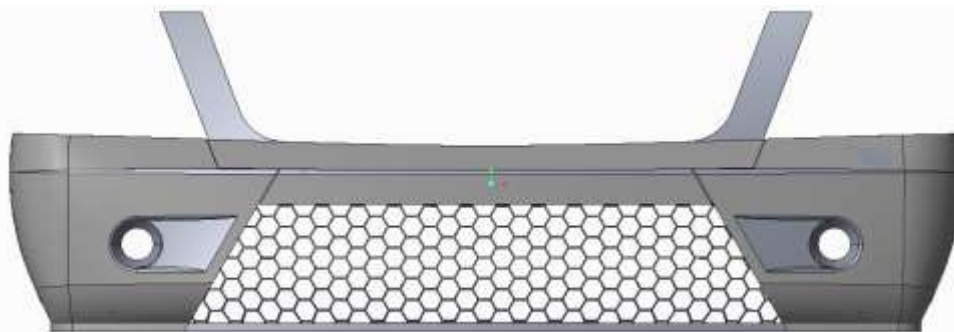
Honeycomb base and Panel assembly (Fascia assembly)
